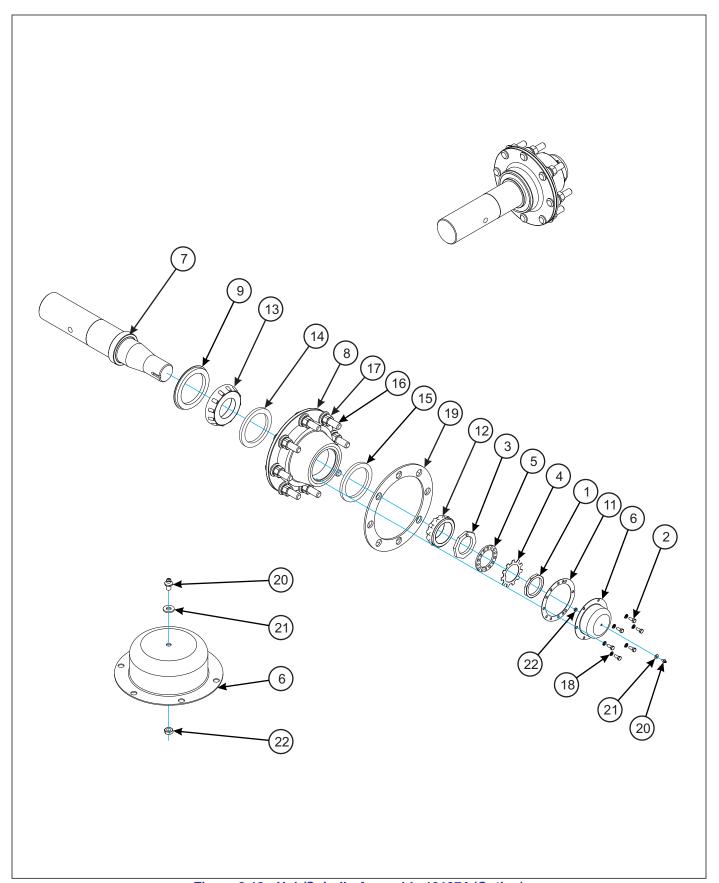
Hub/Spindle Assembly 191974 (Option)
